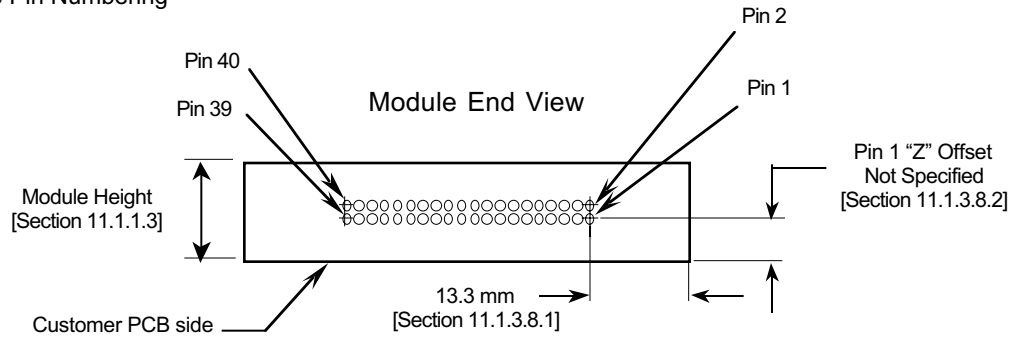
"Z"- Pluggable Connector Dimensions
